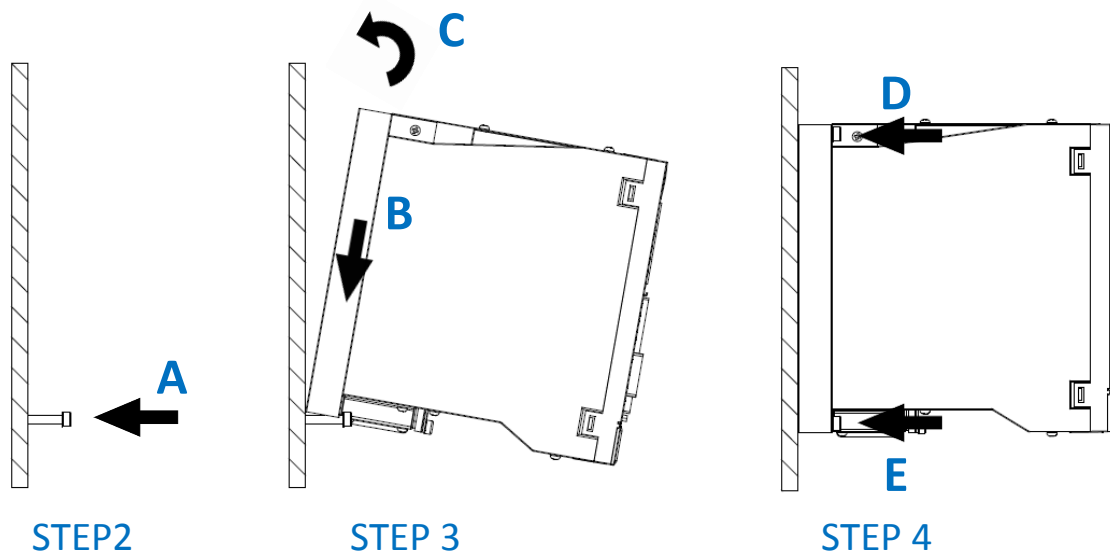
Mechanical Mounting of AMD2000 D2109 Servo Drive
